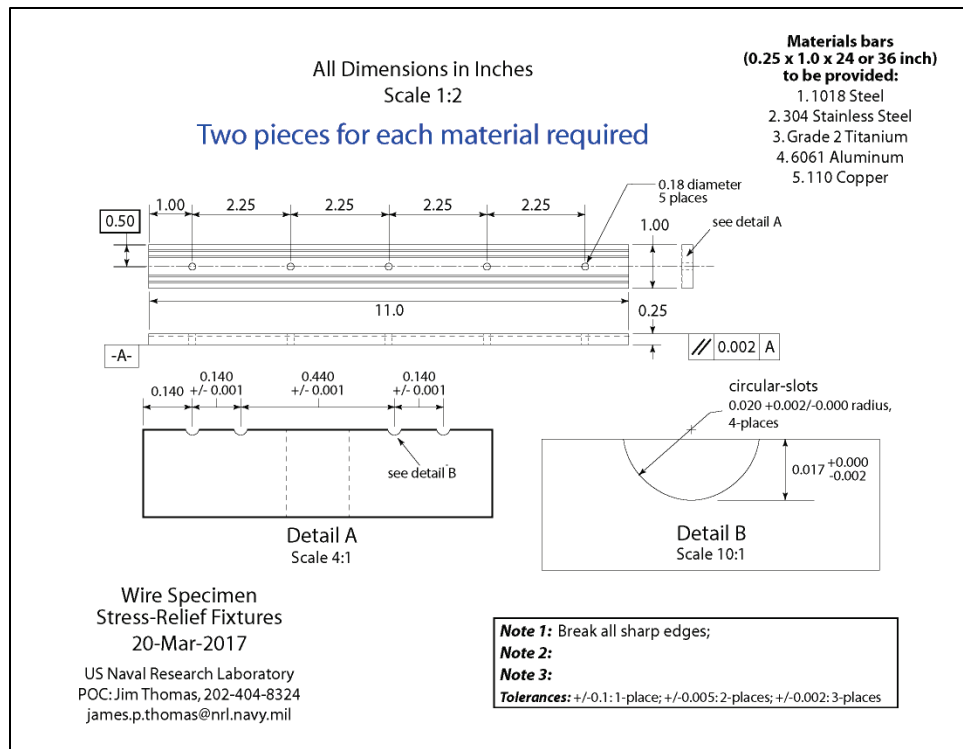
Machining print for the wire stress-relief/straightening fixtures.
